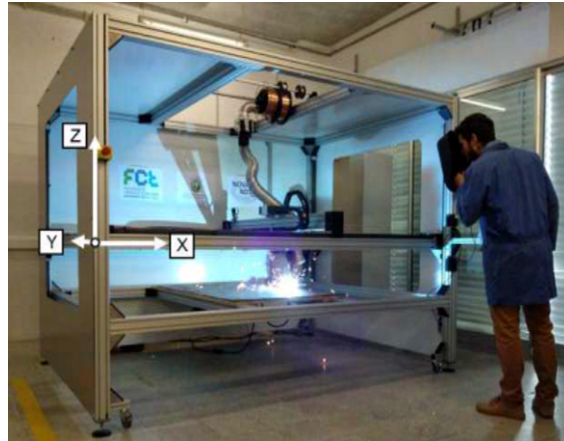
Photograph of the GMAW welding machine, model Pro MIG 501 from KEMPPI
